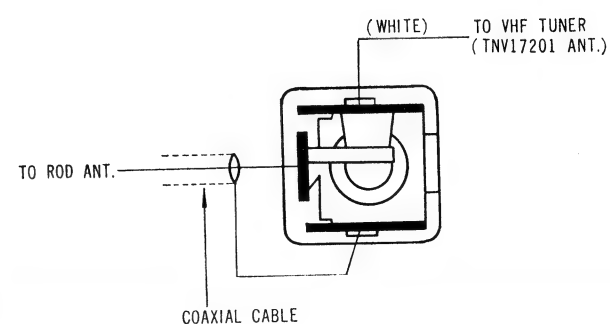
ANTENNA SOCKET (REAR VIEW)
